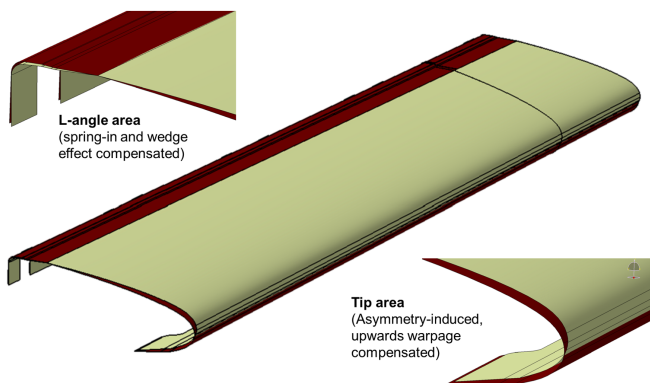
Tool compensation measures, update of nominal CAD design prior tool manufacturing
